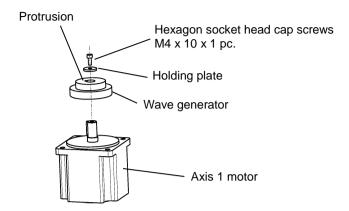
Dismounting axis 1 wave generator (KHL-500, KHL-600, KHL-700)
